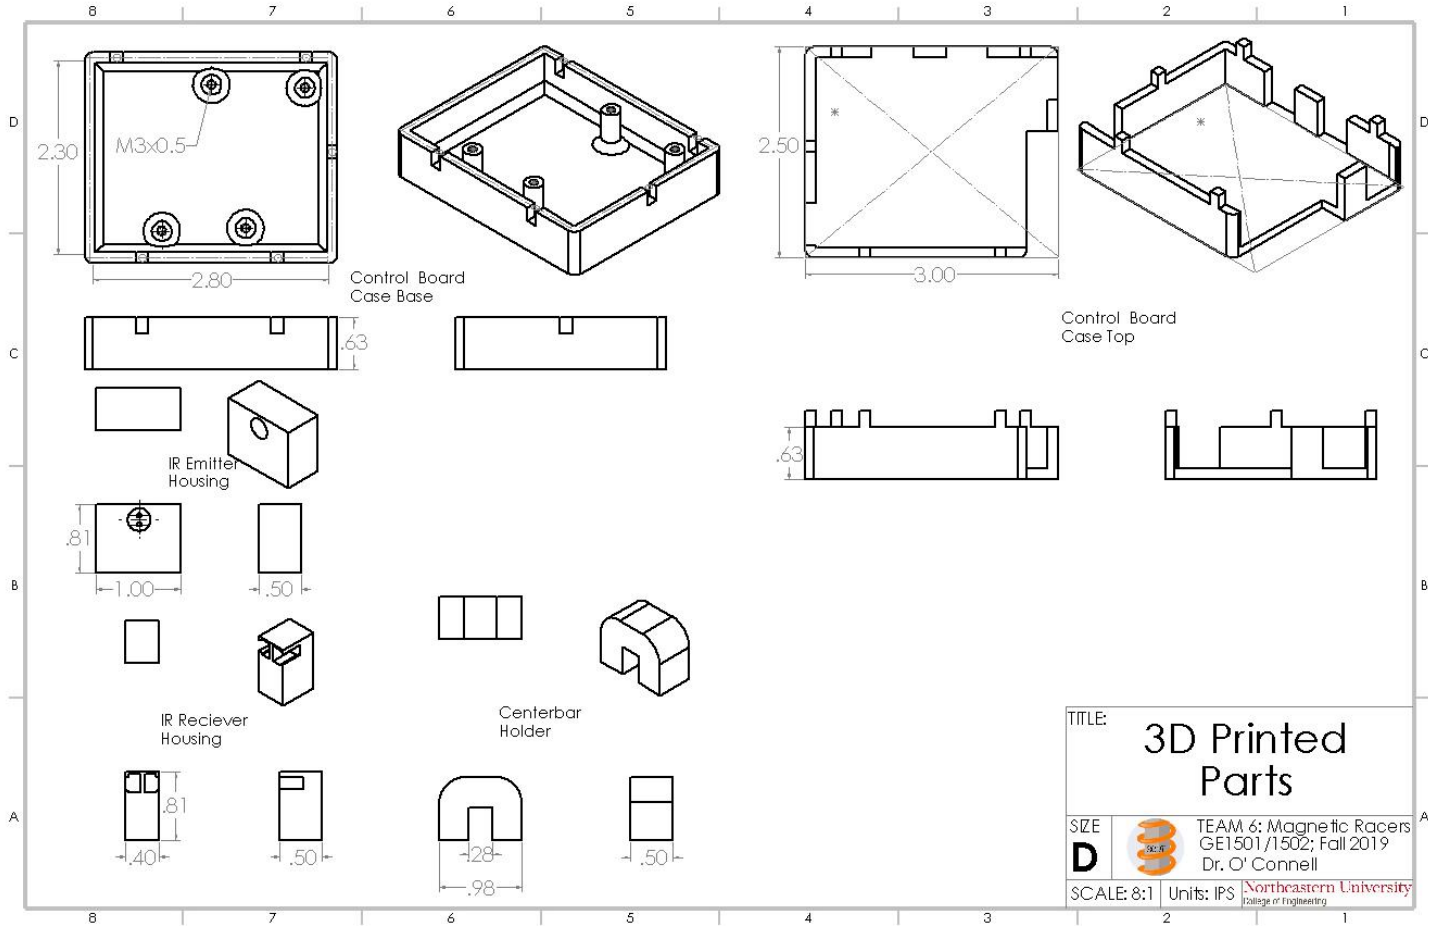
Solidworks drawing of all final 3D printed parts that we manufactured. These are purple in the renders.
